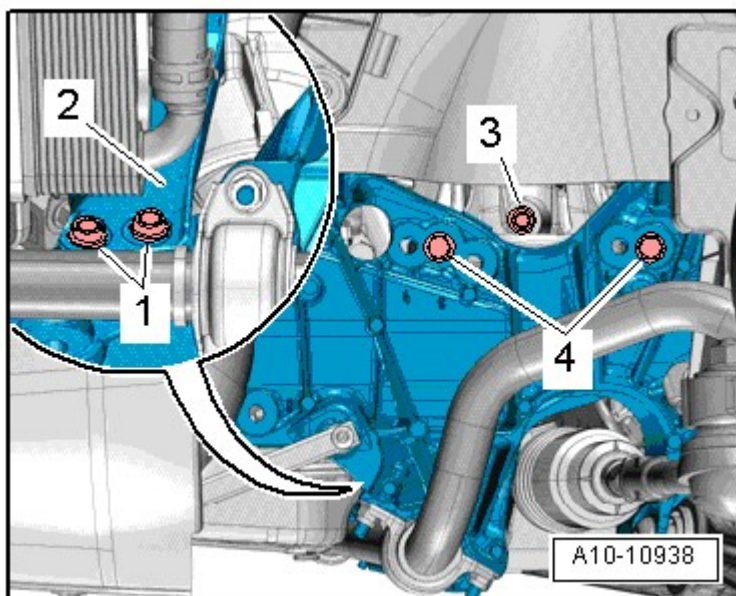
Identifying Left Engine Mount Bolts -1-, -3- And -4-
